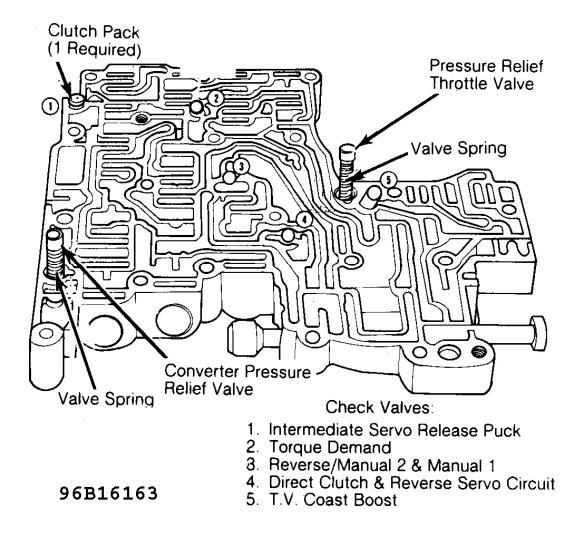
Locations of Check Balls & Pressure Relief Valve in Valve Body Courtesy of FORD MOTOR CO.
